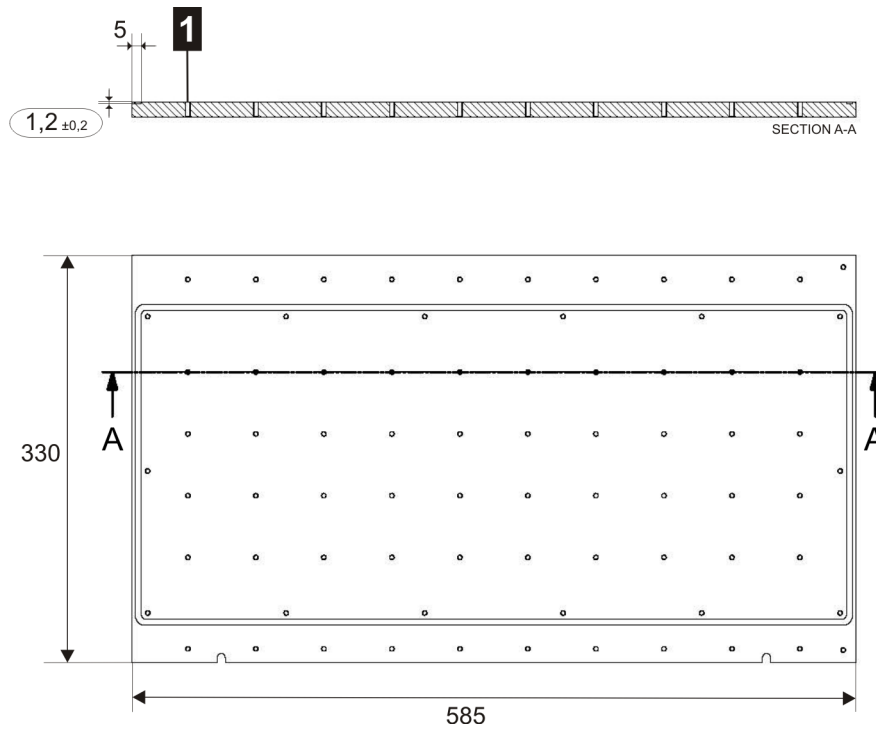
Dimensions of cooling plate D3-XM 300-060, dimensions in mm
